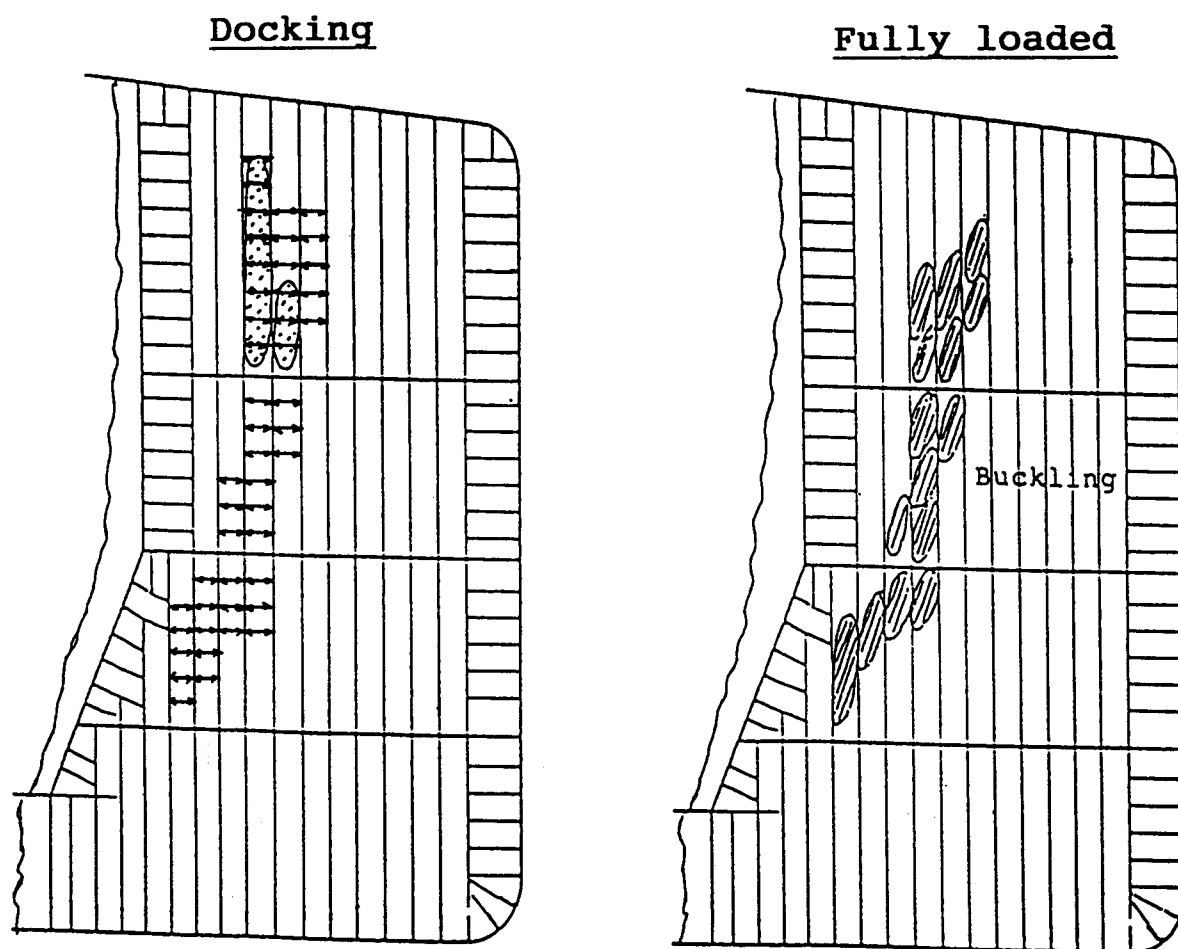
Reinforcement of bulkhead plating with stiffeners at docking.
